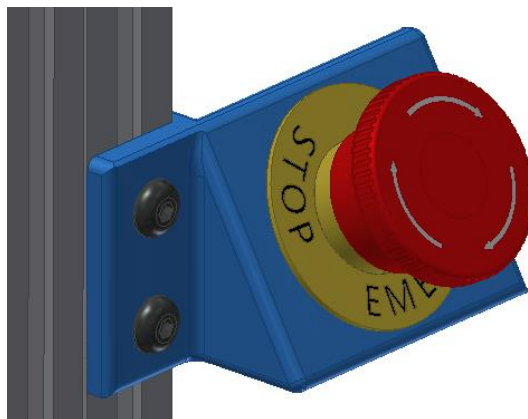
Emergency stop button, mounted on a printed part that fastens to the protective housing.
